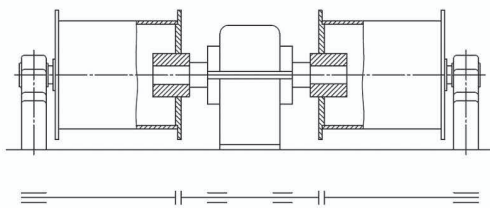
Diagram of a twin-drum drive without built-in joint.
